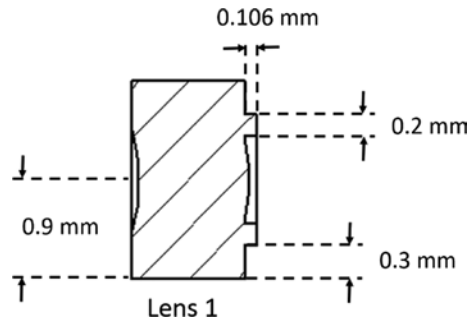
Detailed dimensions for the integrated mechanical mount on lens 1.
